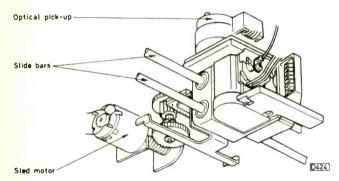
Typical optical sled assembly, showing the slide bars, gears and drive motor. In some cases the motor may be coupled to the gears via a belt.
